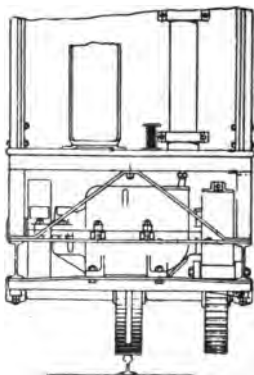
End View of Under Part of Donkey, Gear Wheel of Motor on Right, Single Drive Wheel in Center.
